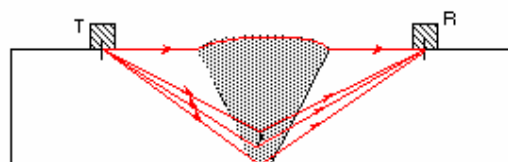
TOFD probe arrangement for weld inspection
